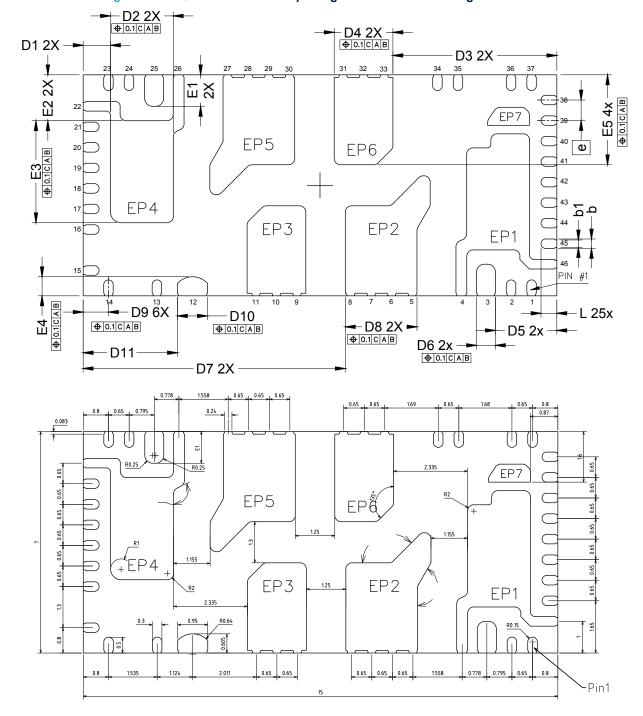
VFQFPN 15 x 7 x 1 mm package dimensions – drawing bottom view
